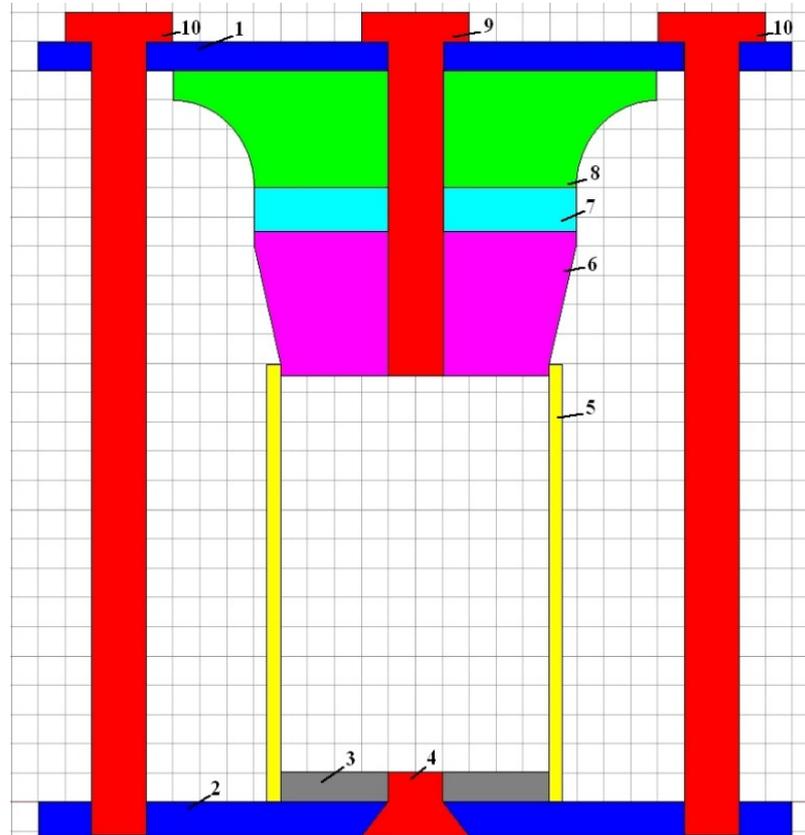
Longitudinal cross section through the energy absorption assembly: 1. Frontal cross-beam; 2. Fixing plate for the penetrating assembly and the buffer pad; 3. Cylindrical guiding flange for the deformable pipe; 4. Fastening screw for the guiding flange; 5. Deformable pipe; 6. Tapered penetrator; 7. Support flange for cutting; 8. Bending flange; 9. Attachment screw for the penetrating assembly; 10. Prestressed fastening screws.
